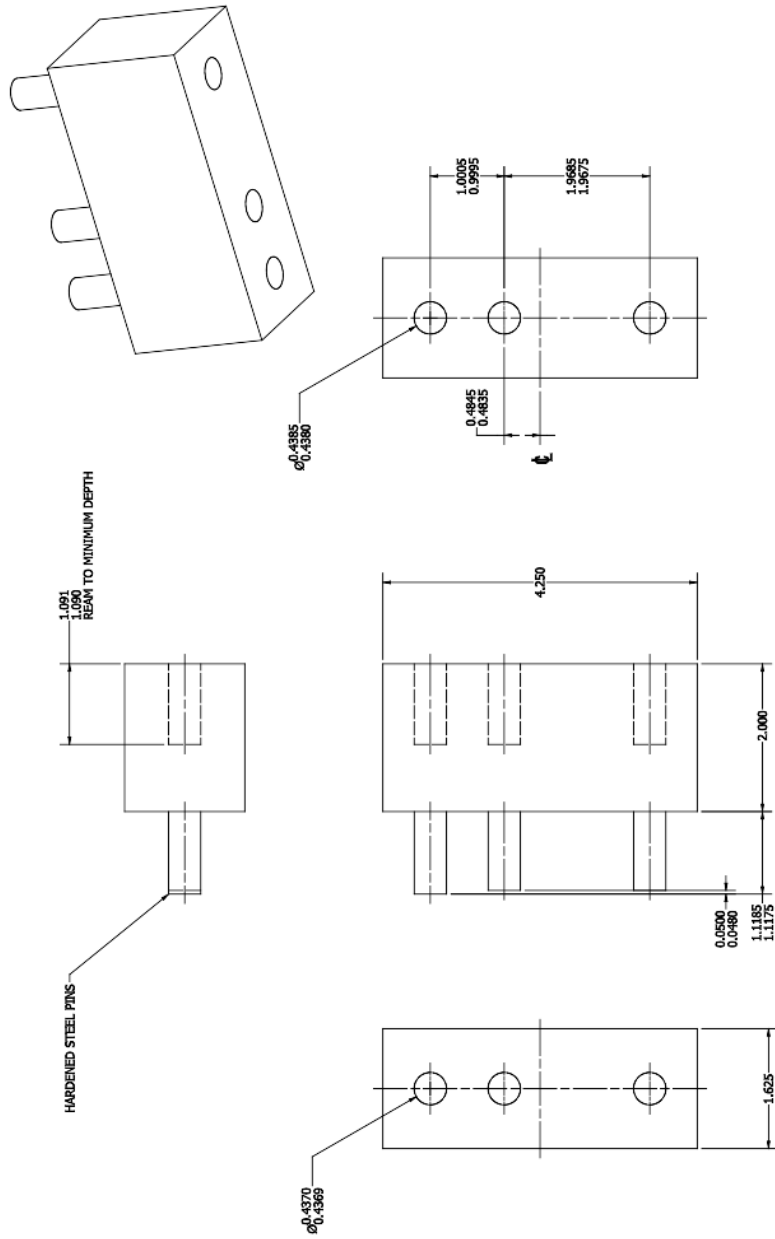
Pin and sleeve alignment test fixture - 100 ampere device (5T100)
